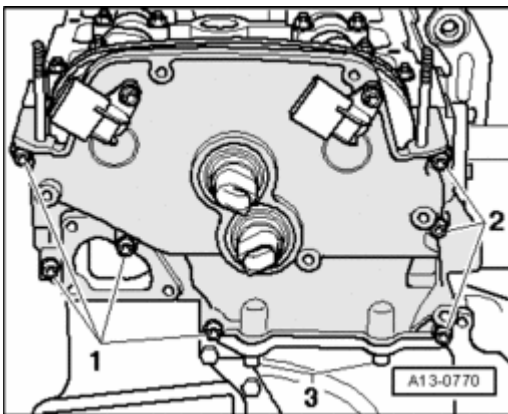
Installing Upper Cover For Camshaft Timing Chain And Tightening Bolts
